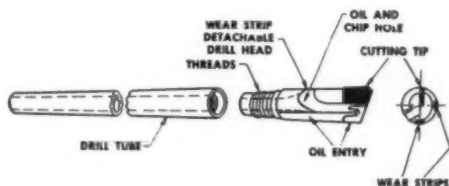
Special design for a short drill which can be rotated instead of rotating the work. Cutting angles are comparable to those used in stationary drills; chips are carried out through center of drill instead of an external flute.
